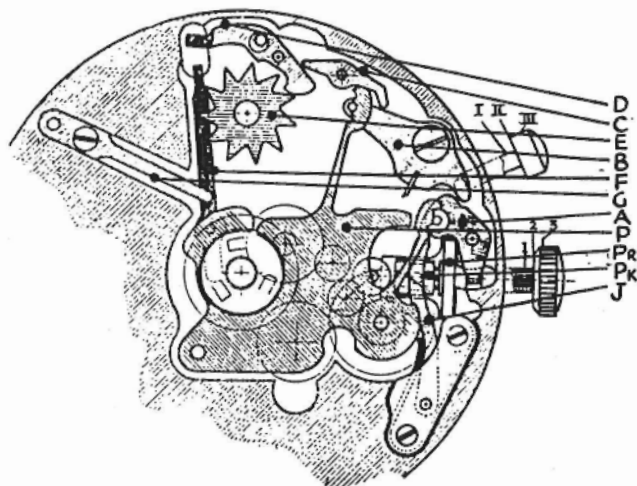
Position 2-II. Stopping the alarm. D alarm hammer lever; C alarm stop lever; E star wheel; B alarm rocker; F disconnecting lever; G disconnector spring; A setting lever; P yoke holder spring; Pr winding pinion; Pk clutch wheel; J hand-setting yoke.
